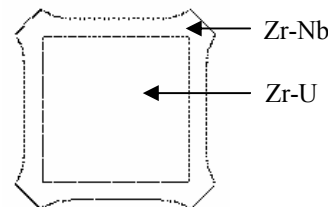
The cross section of the Fuel rod after coextrusion process.
